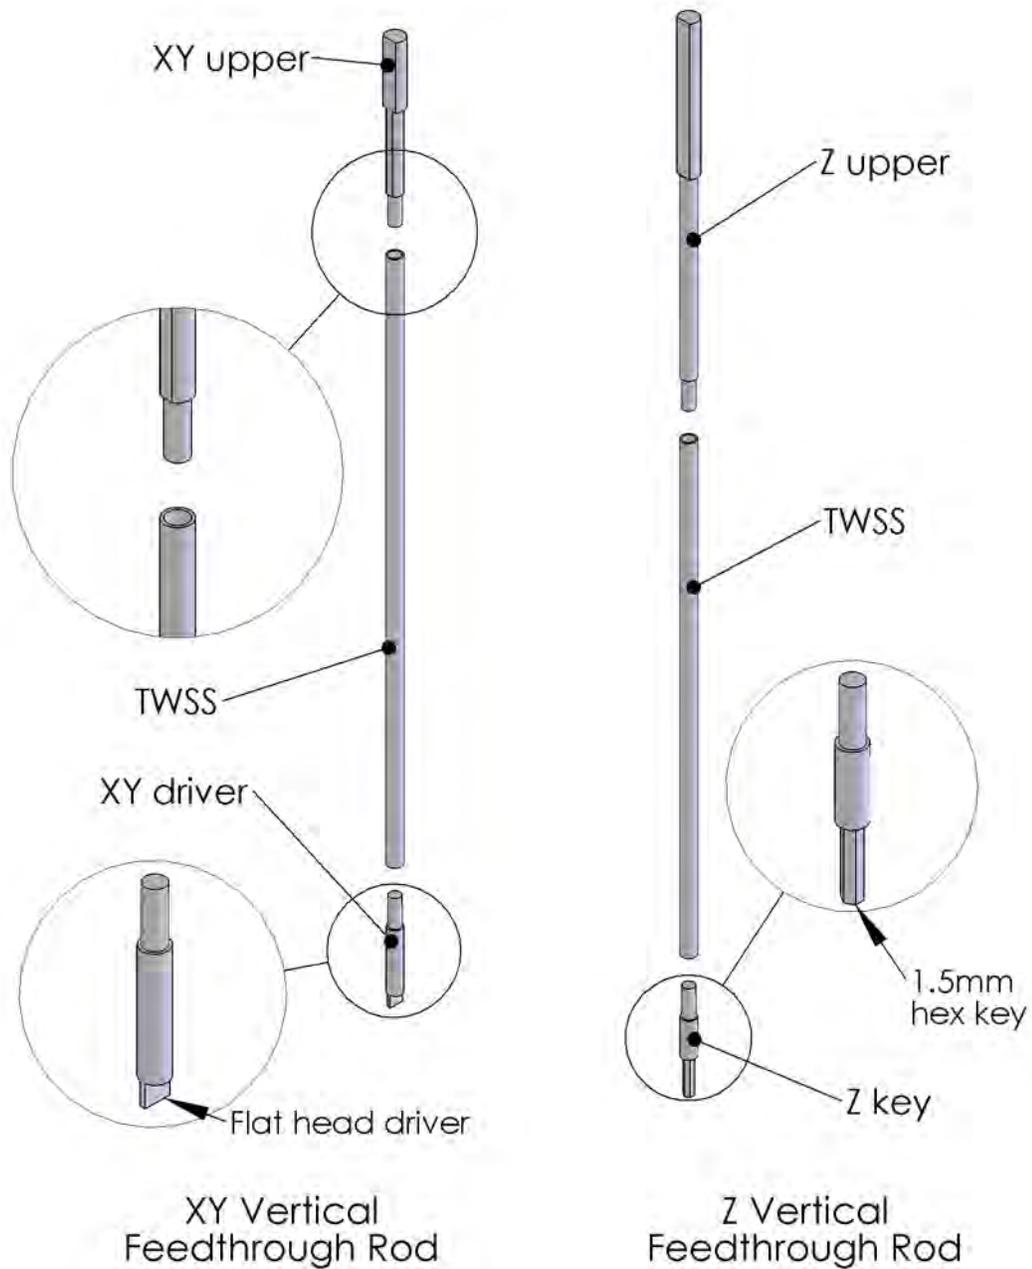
Illustrations of the xy and z vertical feedthrough rods. Each rod is comprised of a 0.1" diameter thin wall stainless steel rod with stainless steel plugs epoxied in each end. The upper plug allows for the attachment of a worm or mitre gear to drive the feedthrough, while the lower plug allows for the driving of the xy coarse position screws with a flat head driver, or the z coarse approach screw with a 1.5 mm hex driver.
